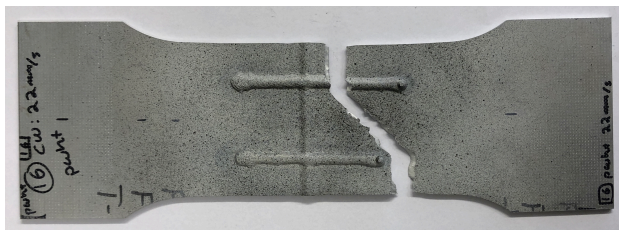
Fractured specimen with cross weld speed 22 mm/s, with PWHT.
